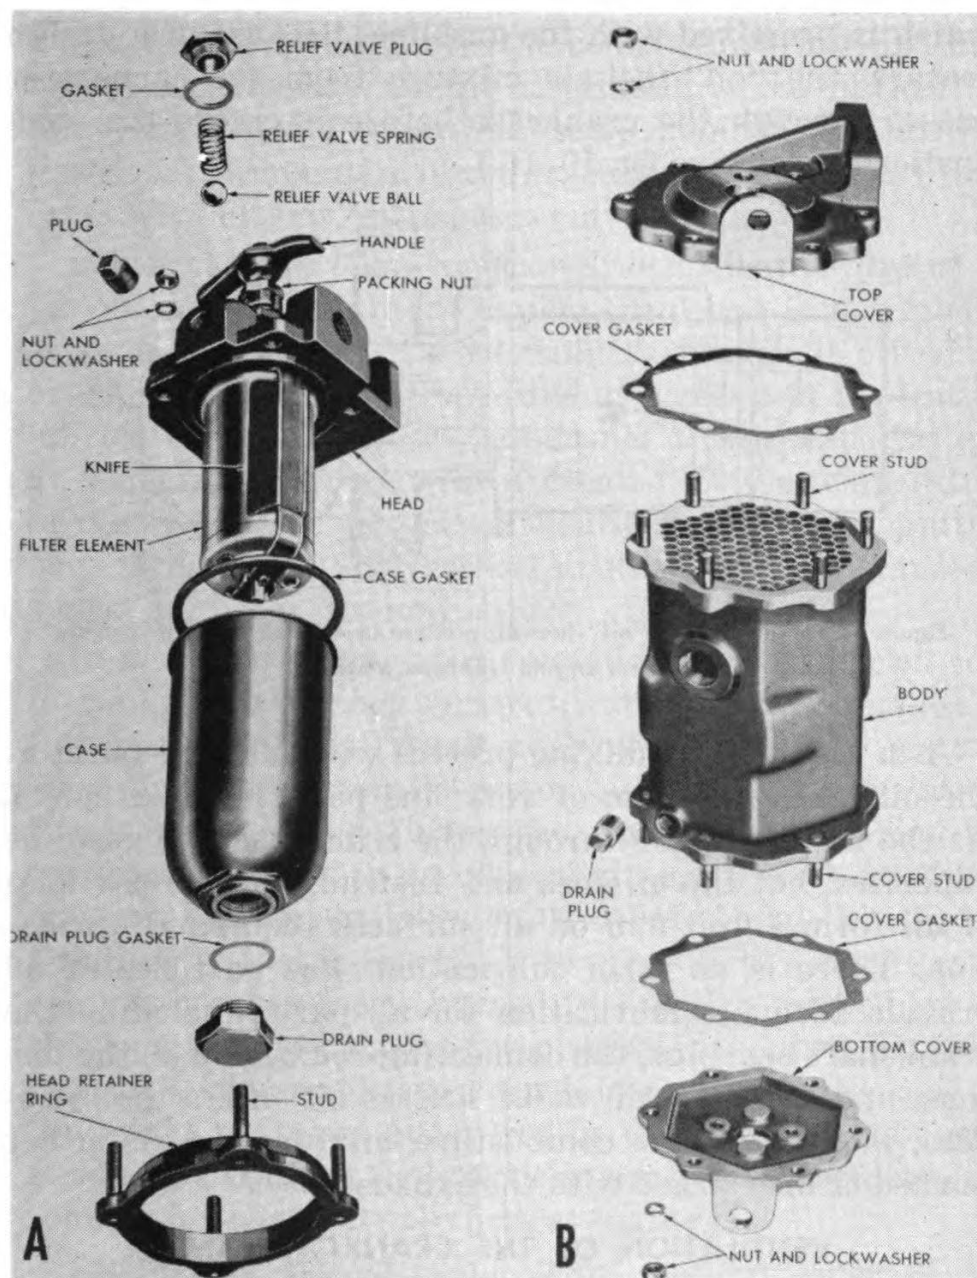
Principal parts in the external lubricating-oil system of a gasoline engine (Chrysler M-8).
